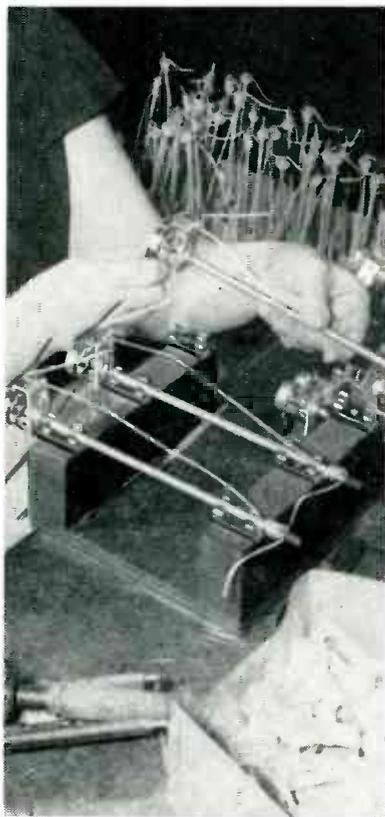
Inexpensive standard fuse clips are ideal holding jigs for potentiometer subassemblies
